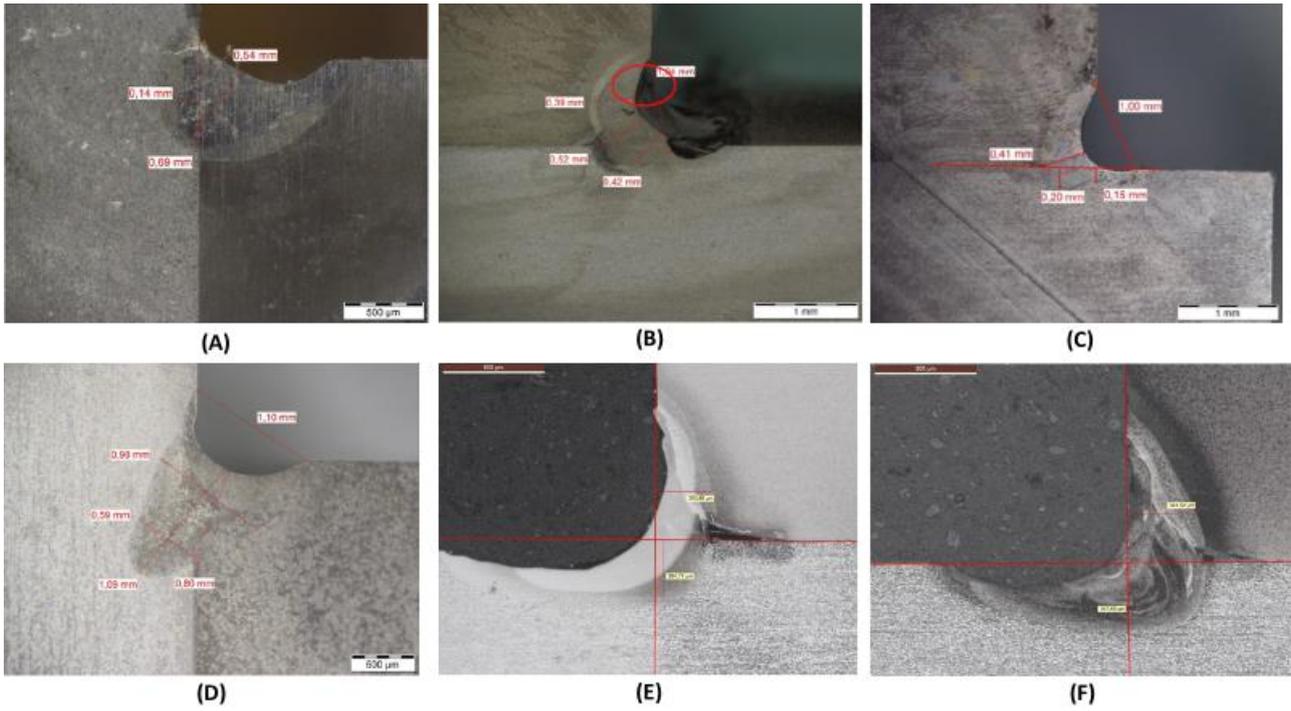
Cross-section of the welded joint with different parameters: (A) parameter 1, (B) parameter 2, (C) parameter 3, (D) parameter 4, (E) parameter 5, side 1, (F) parameter 5, side 2 [7]
